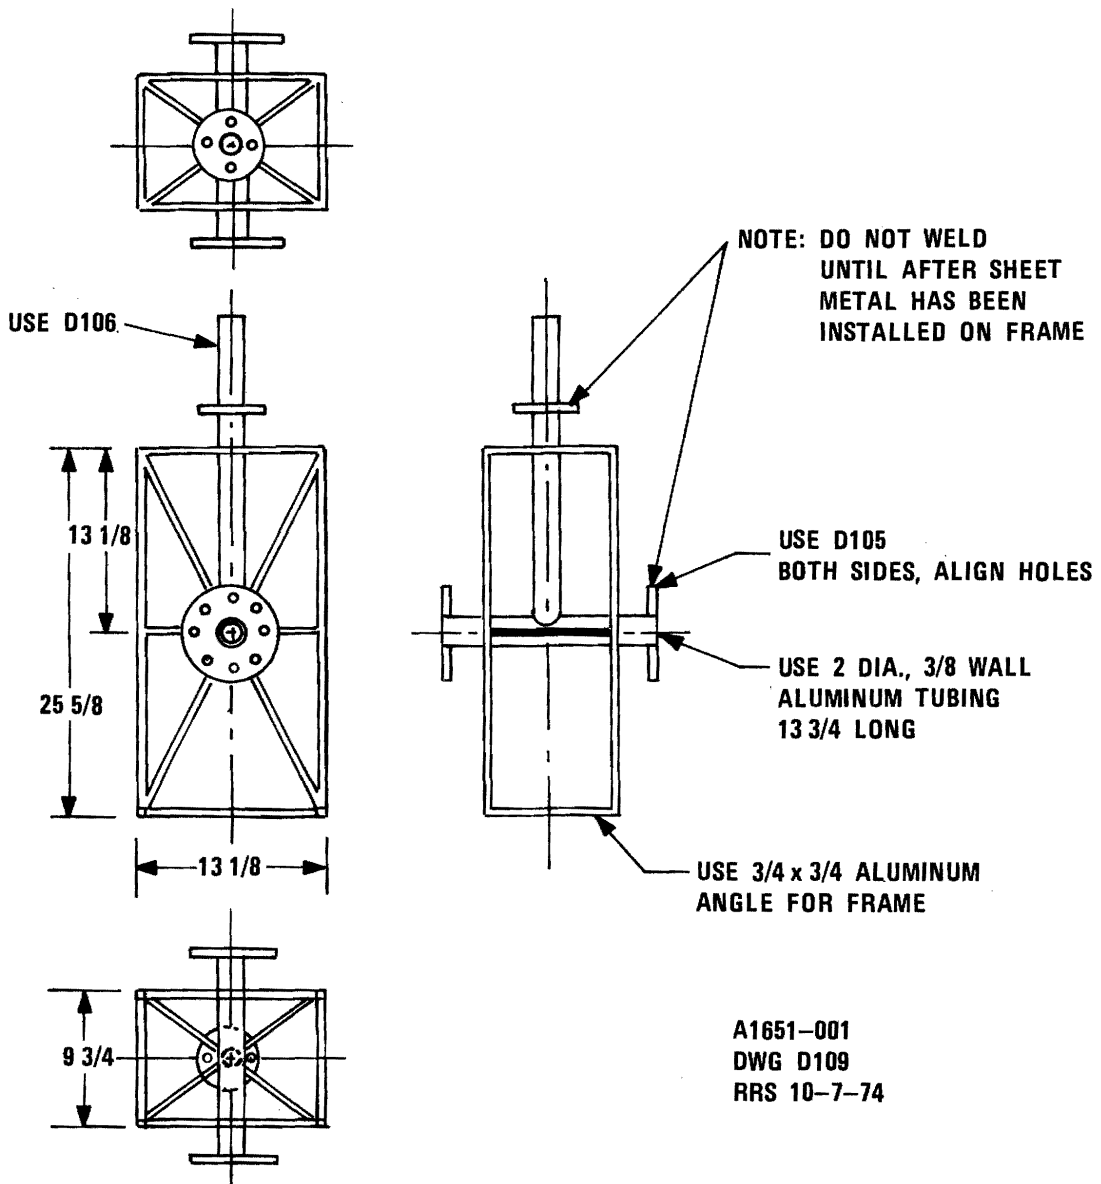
Scale Model Assembly Drawing w/o 30-cm Ion Engines.
